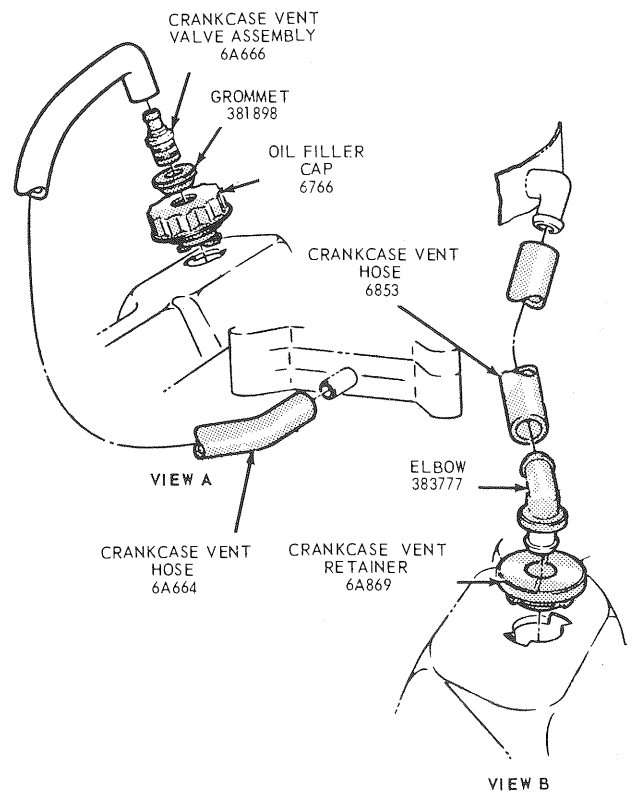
Crankcase Ventilation System Regulator Valve Installed
